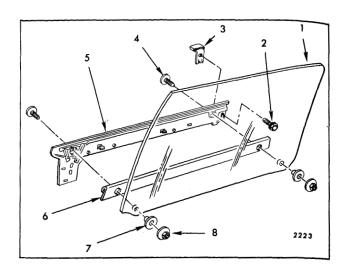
Rear Door Window Assembly - 68069-68169 Style
